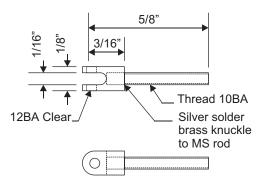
Lower Lifting Link X2, Brass & MS fabrication
